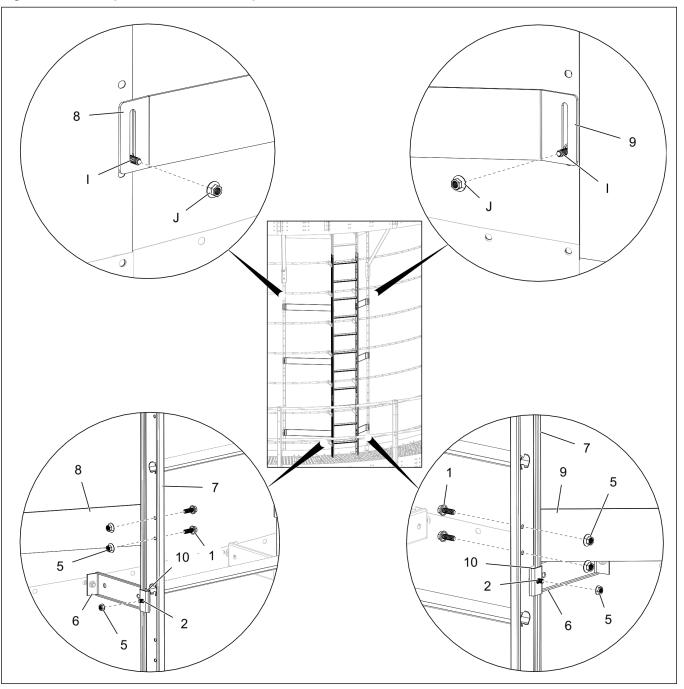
Installing the ladder stand-off and ladder brace brackets at catwalk
